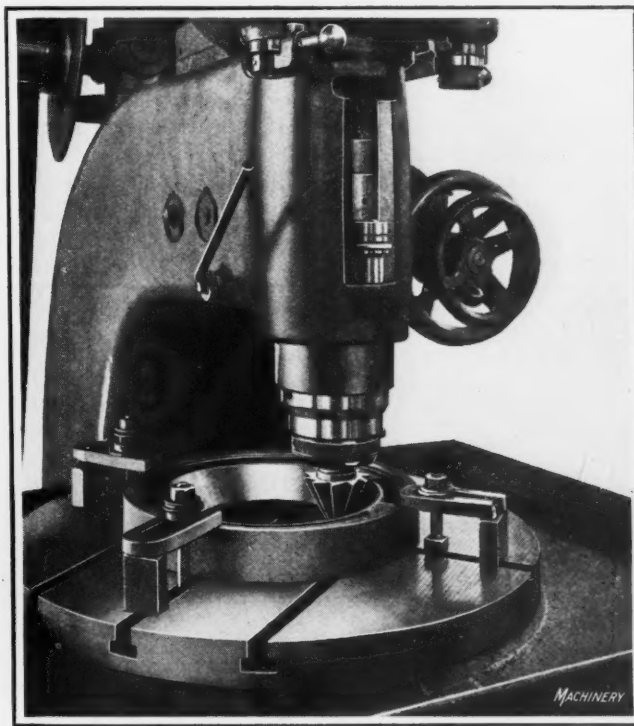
Milling a 30-degree Bevel on a Gear Blank
